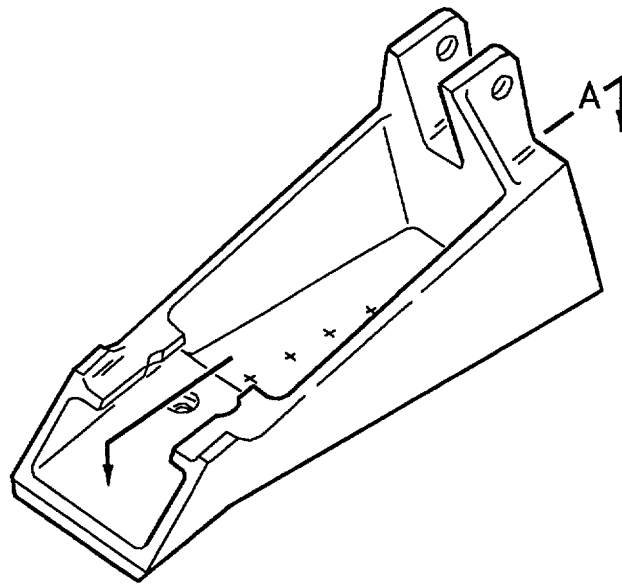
Thruster Support, 74A350748, Fastener Index (Sheet 1)
